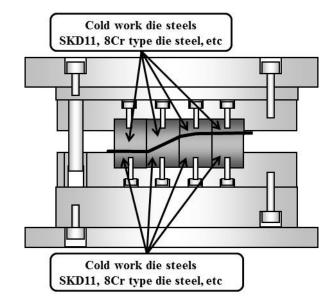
Schematic illustration: Cold stamping of large sized automotive parts.
